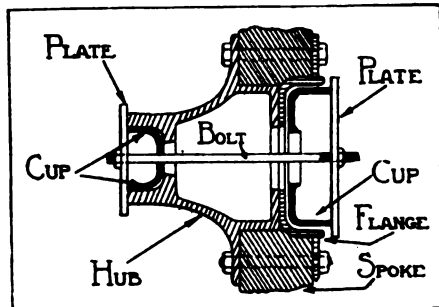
Equipment for Pressing in Ball Races in Wheels.
